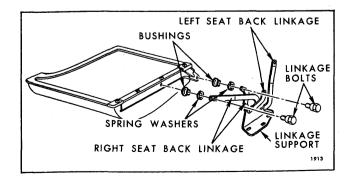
Folding Second Seat Back Inner Linkage and Support
